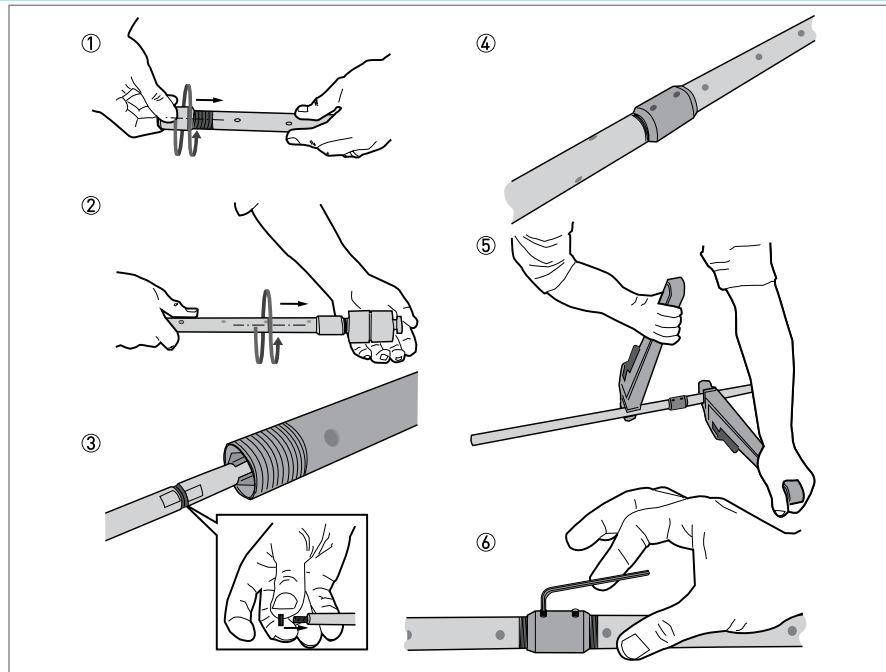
Assemble the Segmented Coaxial Probe Part 2
